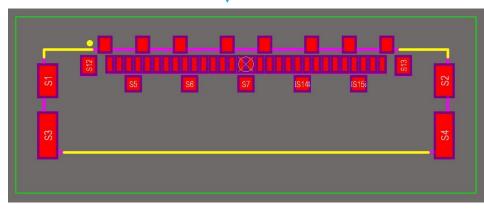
Bottom View of e-CAM222_CUMI2311_MOD
